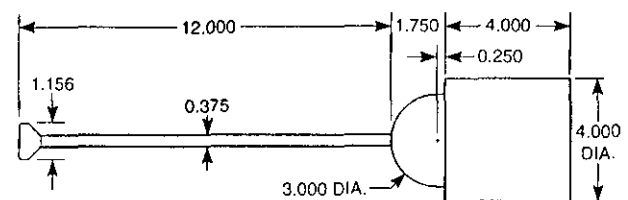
Aerospoke surface geometry dimensions (in inches).
